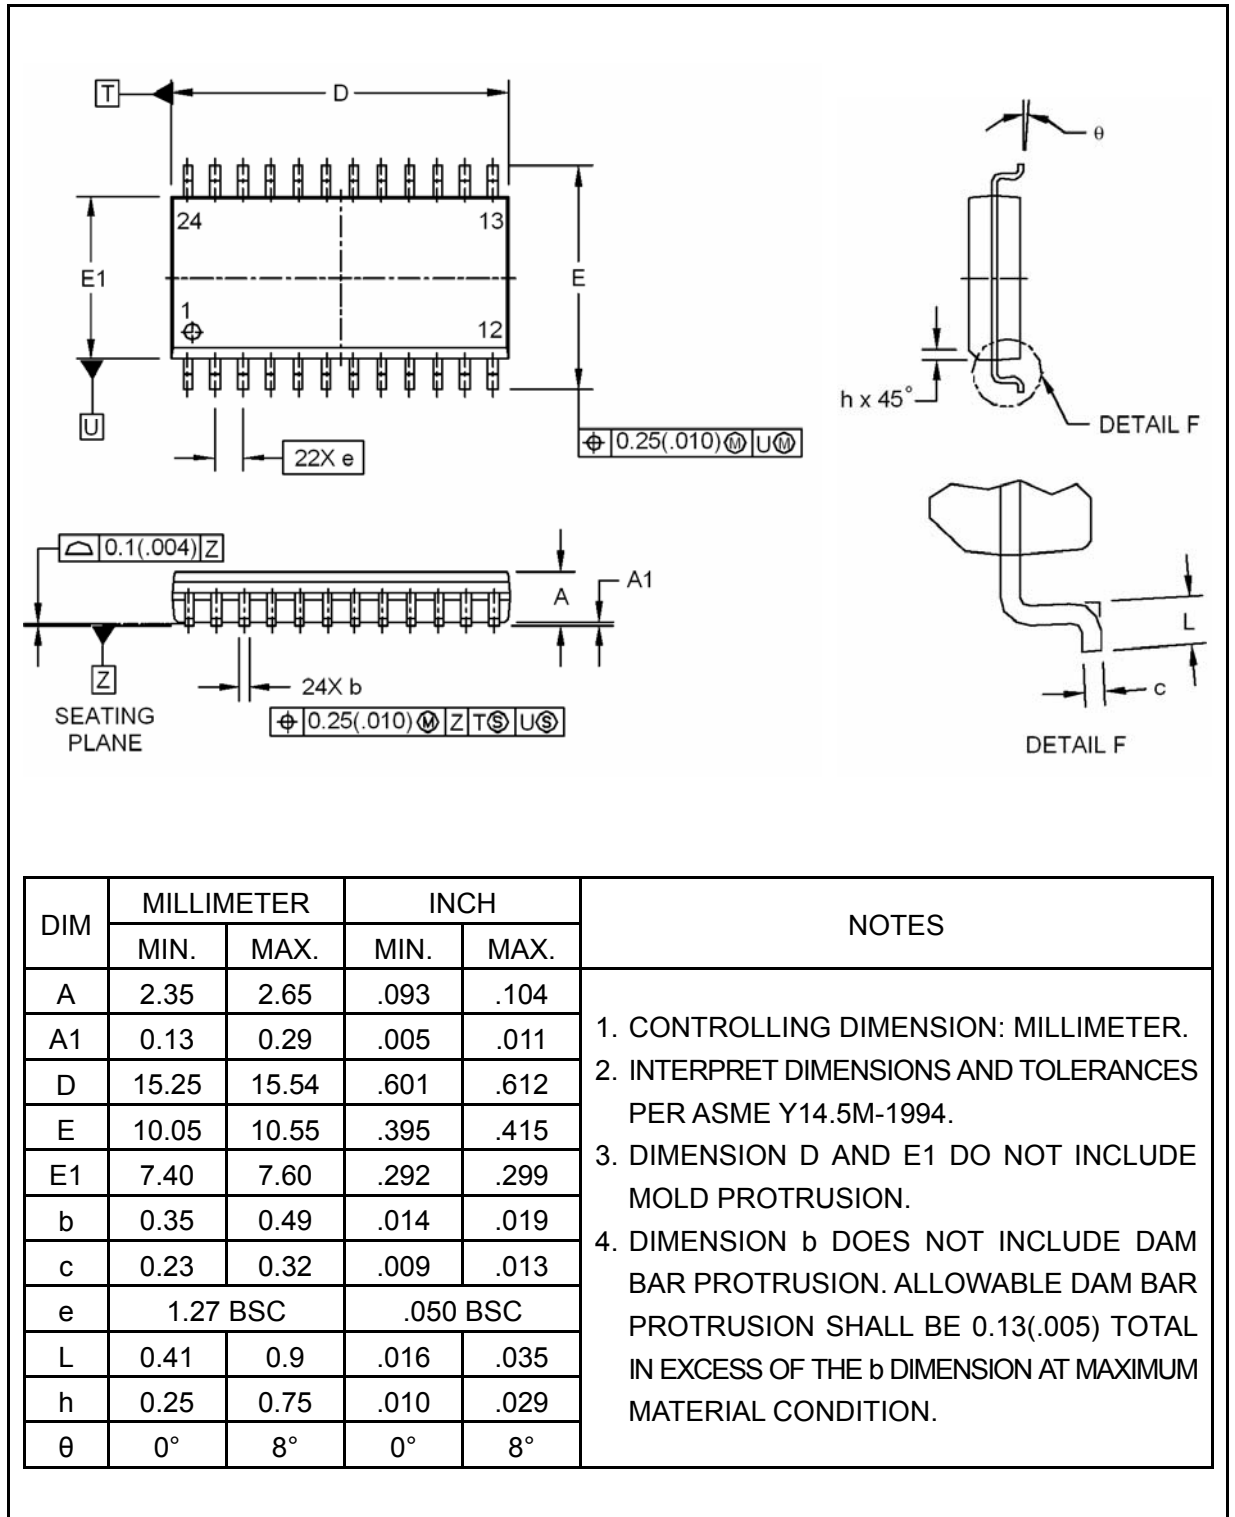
FM17XX 24-Pin SOP Package Dimensions
